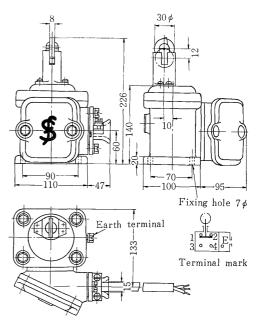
Outline of flame-proof end limit switch, dRC 4006 R
